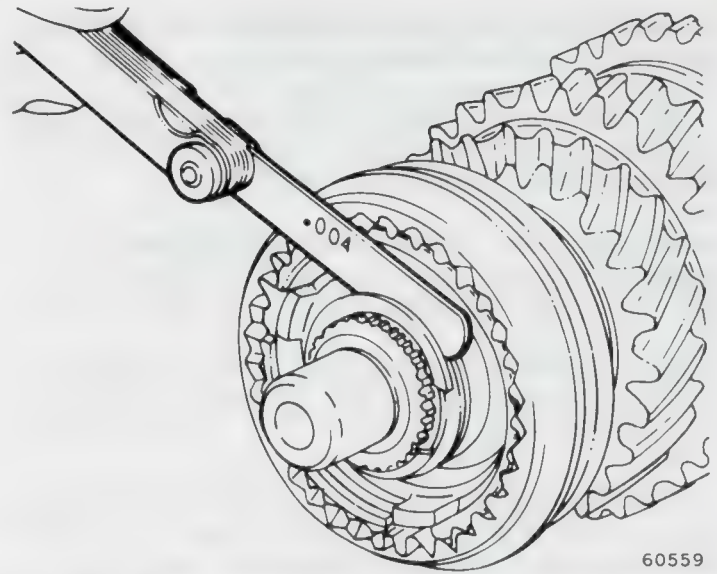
B-16 Measuring Second-Third Synchronizer End Play
